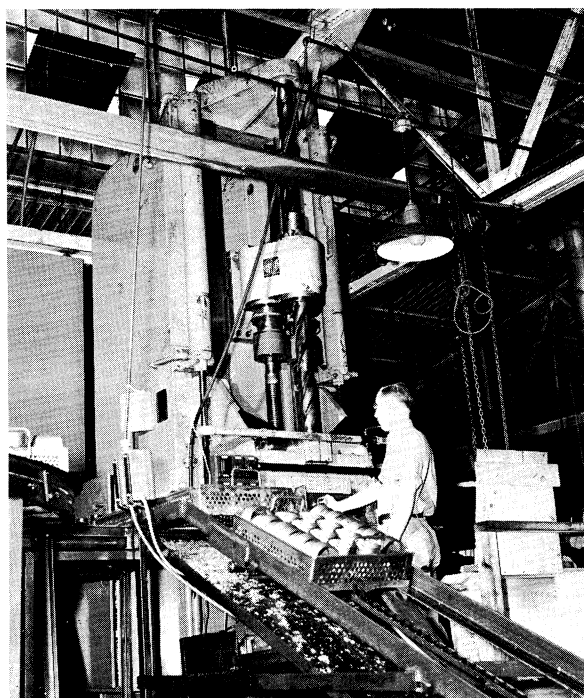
Full-Form finish broaching of internal helical gears two-at-a-time on a vertical broach.
